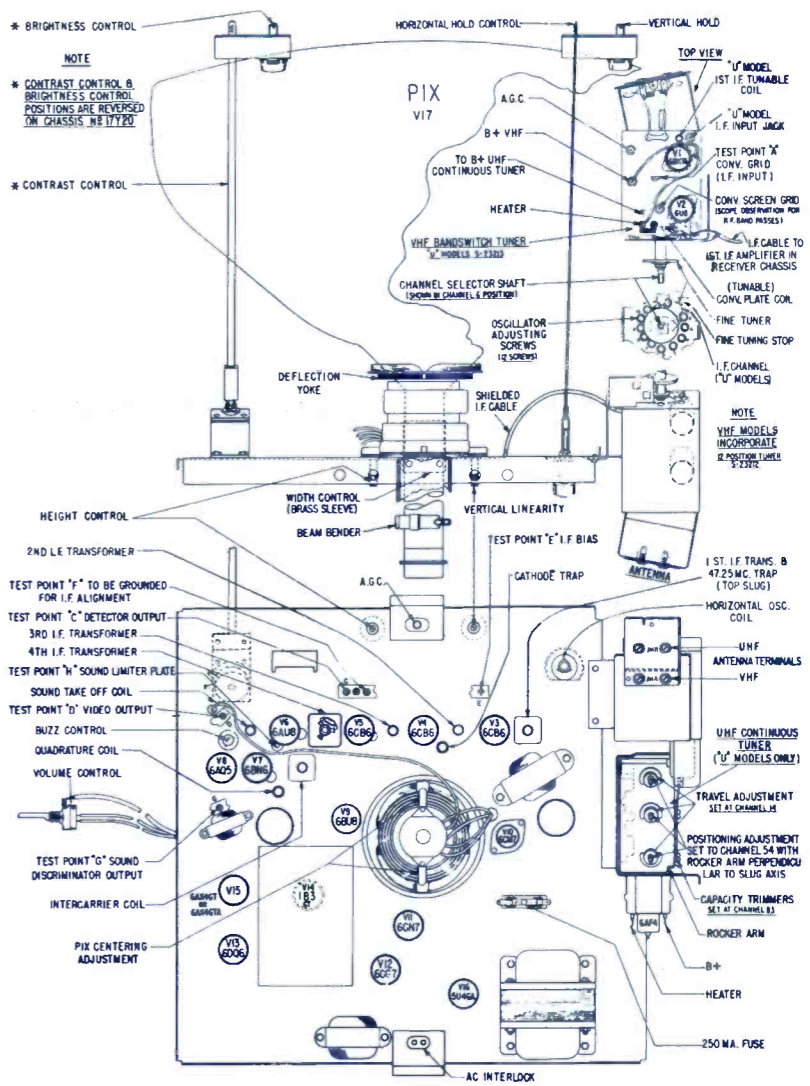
Tube and Trimmer Layout 17Y20 & 17Y22 Chassis
